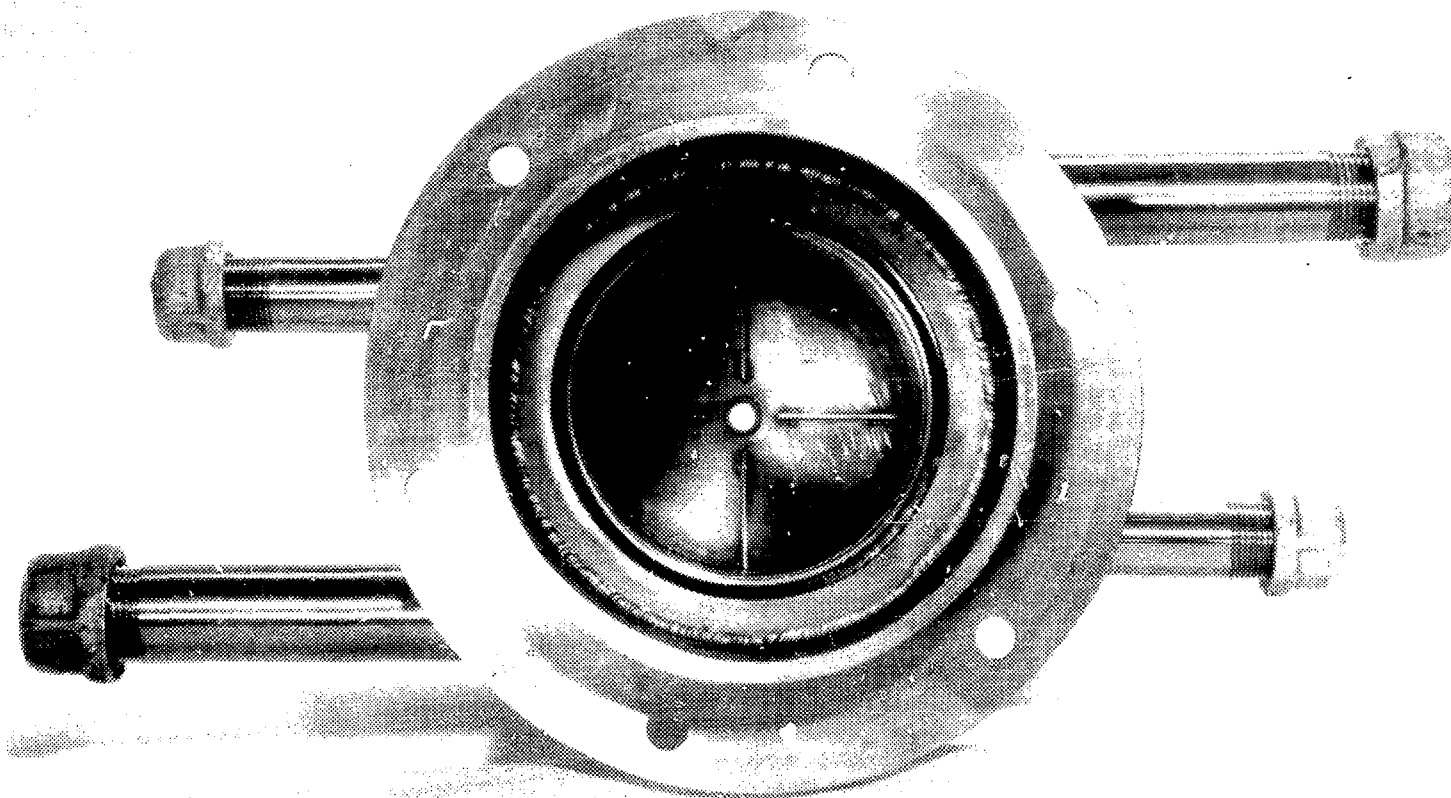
CONTACTOR CASING (ANL Photo No. 308-77-603)
